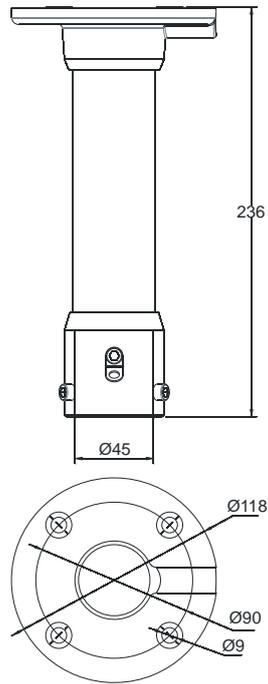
Picture of dimensions of ceiling installation arm
